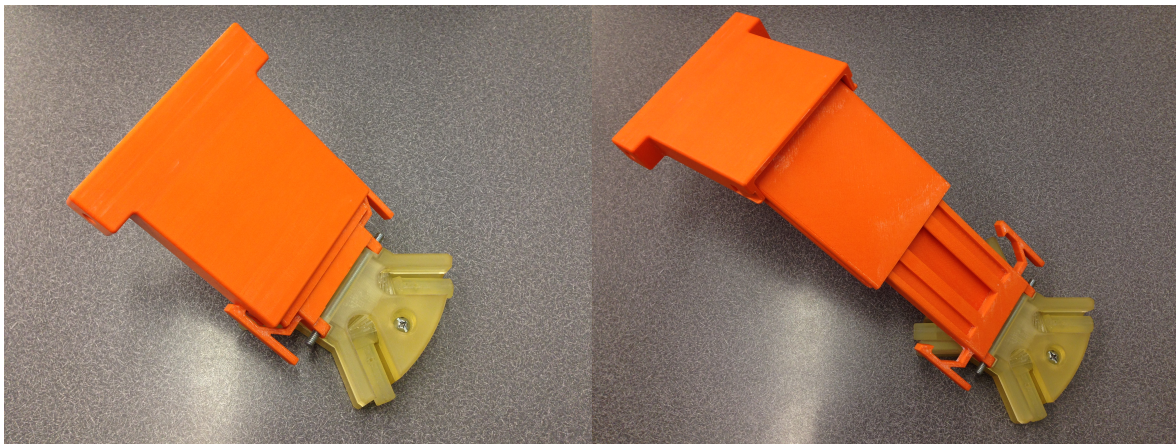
(a) 3D printed Telescoping Slider Latch in extended (unfolded) position,
